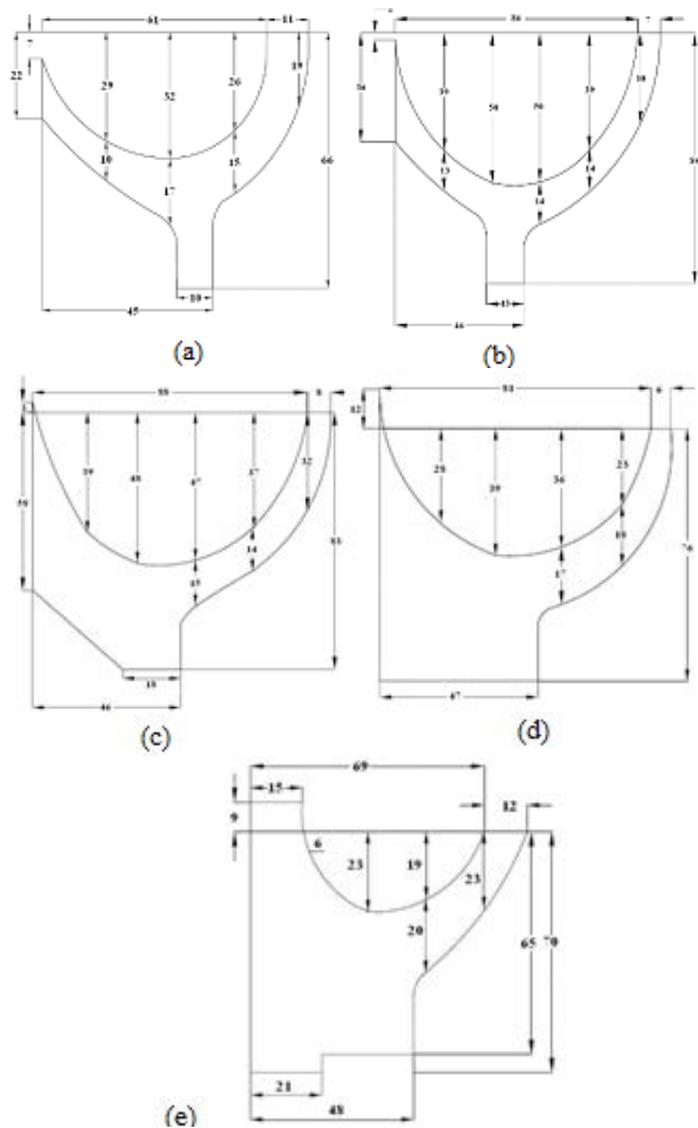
Five Section of Bucket Curvature: (a) Section Two, (b) Section Four, (c) Section Five, (d) Section Six and (e) Section Seven
